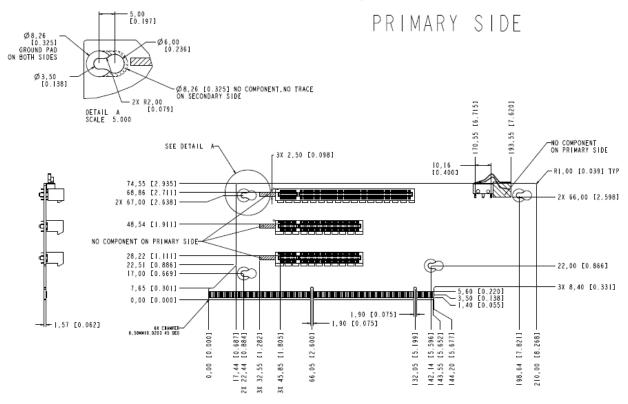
2U PCI Express* Passive Riser - Primary Side
